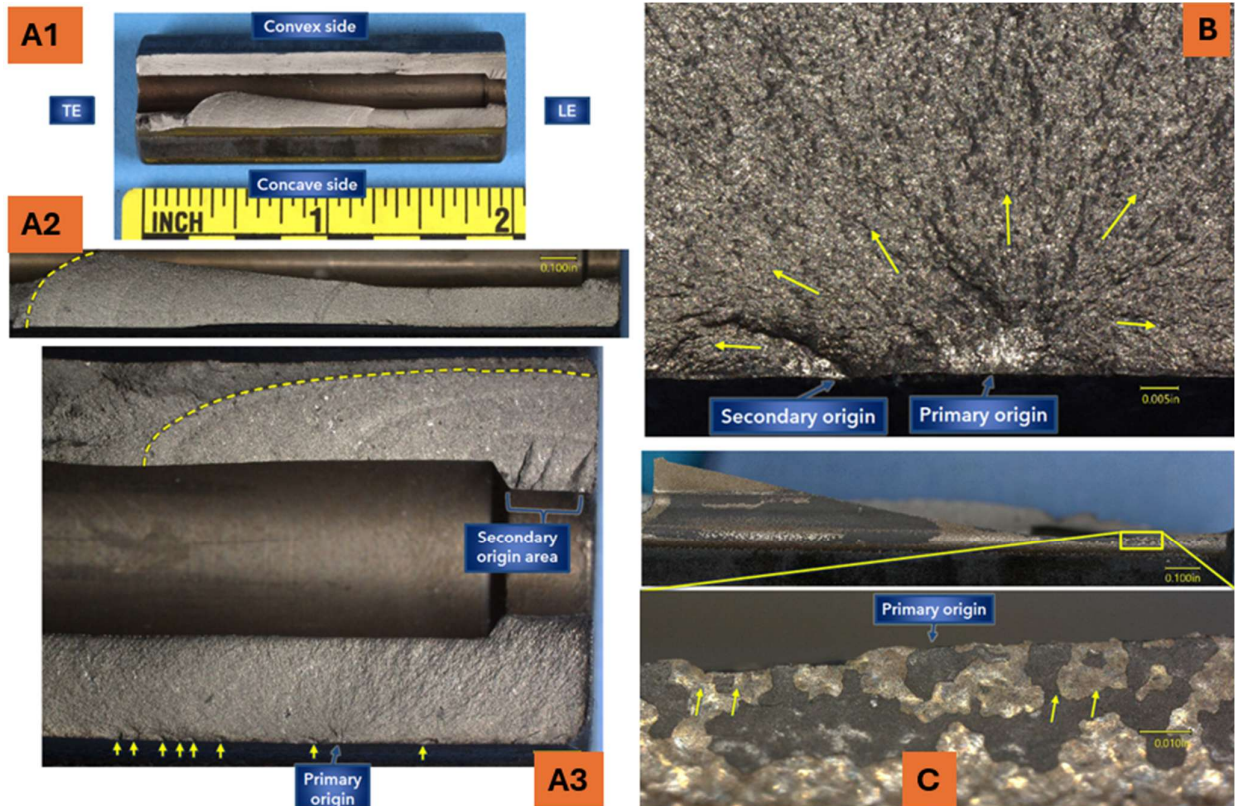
A1- Fracture surface of blade 1 (upper image, A2- closer views of the fatigue region on the concave side (middle image) and A3-origin areas at the leading end of the dovetail (lower image). B- the primary origin area on the blade 1 fracture surface. C- Surface adjacent to the primary origin area showing a peened surface finish
